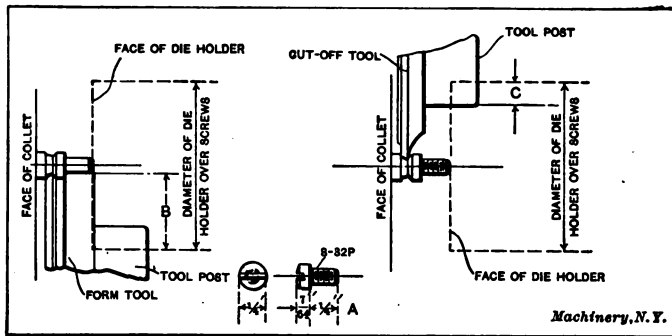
Diagram illustrating Method of Finding Clearance for Die Holder
